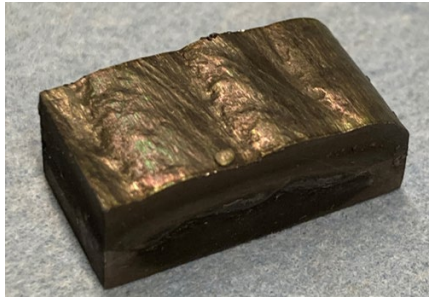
A photograph of the as-received overlay weld coating.
